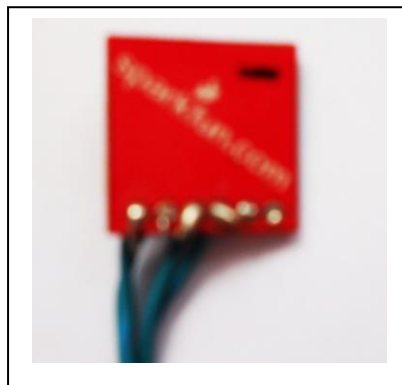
Solder Each Wire on the Accelerometer breakout Board
